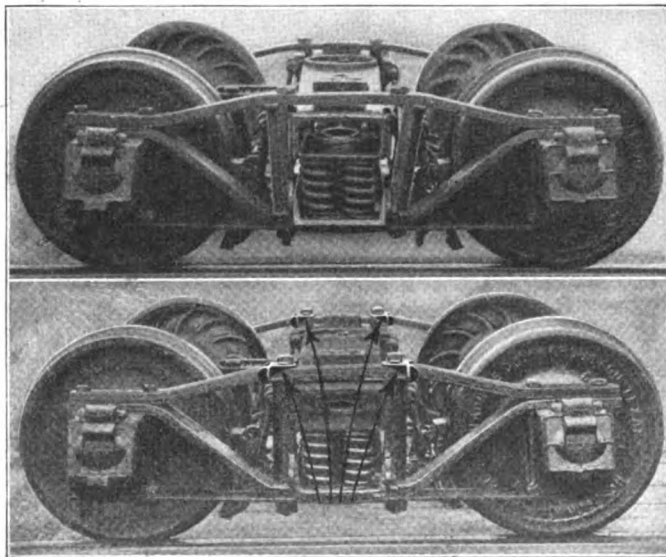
Arch bar truck with broken columns (above); Same truck with broken columns held in place by Universal truck column anchors (below)
